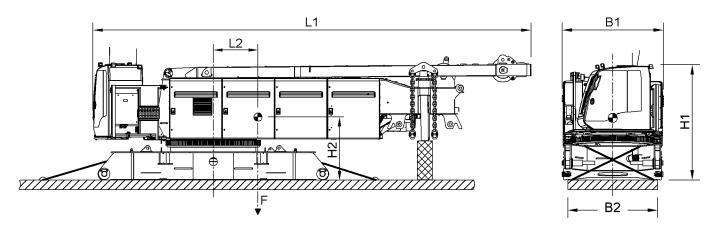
Dimensions of transporting the basic machine with a low loader
